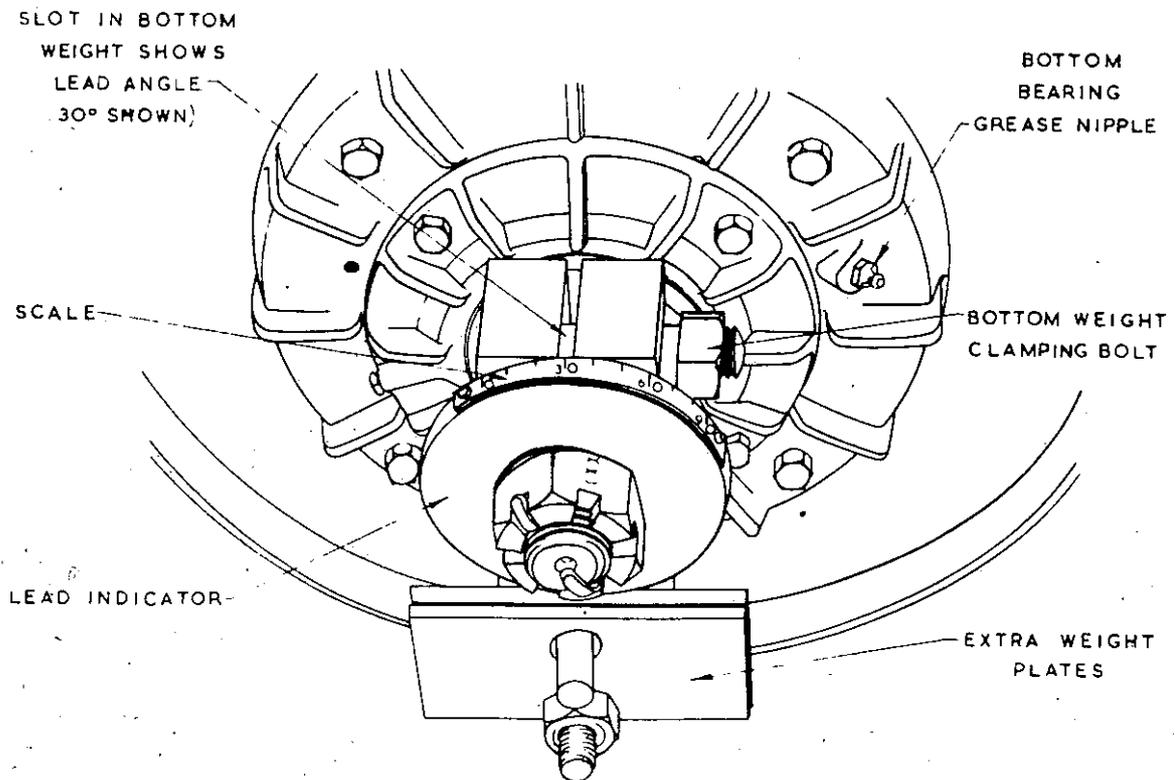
VIEW SHOWING BOTTOM MOTOR WEIGHT
